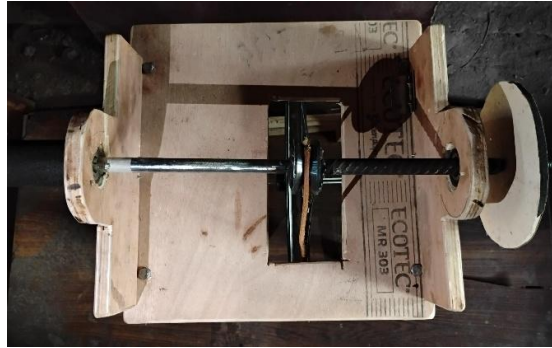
Portable Manually Operated Deburring Machine Top View
